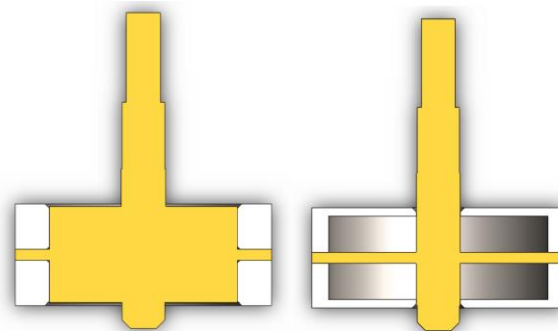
Actual design of the rotary parts (left) and the improved version (right).
